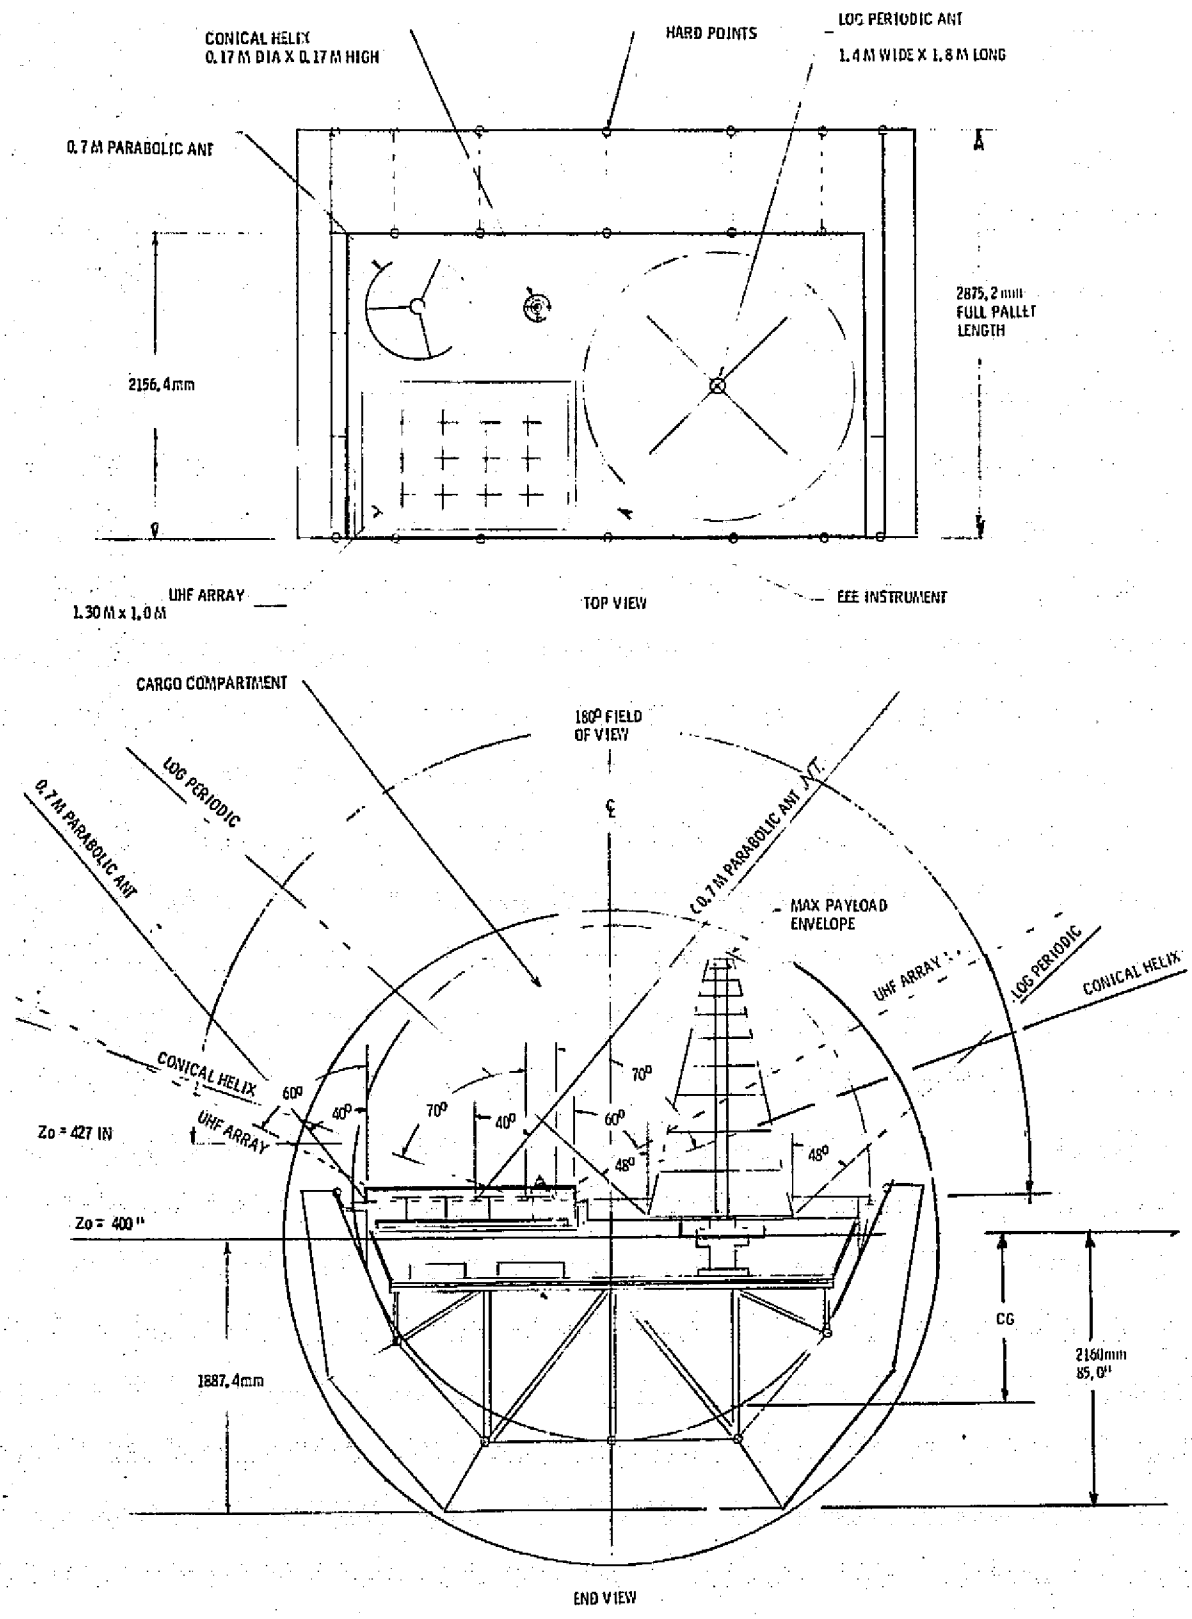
EEE Pallet Layout and Antenna Field of View
